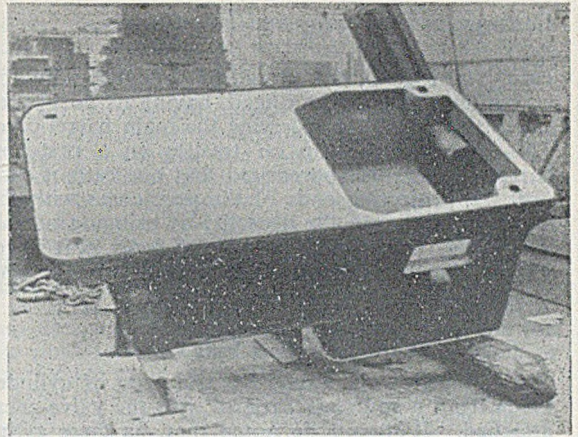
Casting in which the Solid Anvil Block is cast integrally with the Cylinder Base-plate which is only $\frac{3}{8}$ in. thick.
